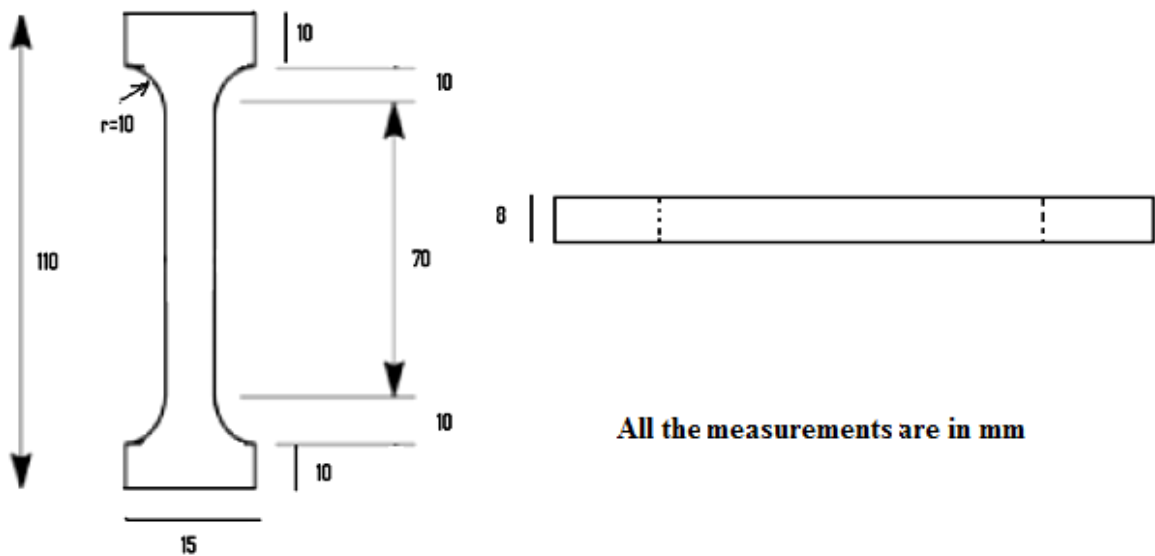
Dimensions of the specimens used in the tensile tests.
